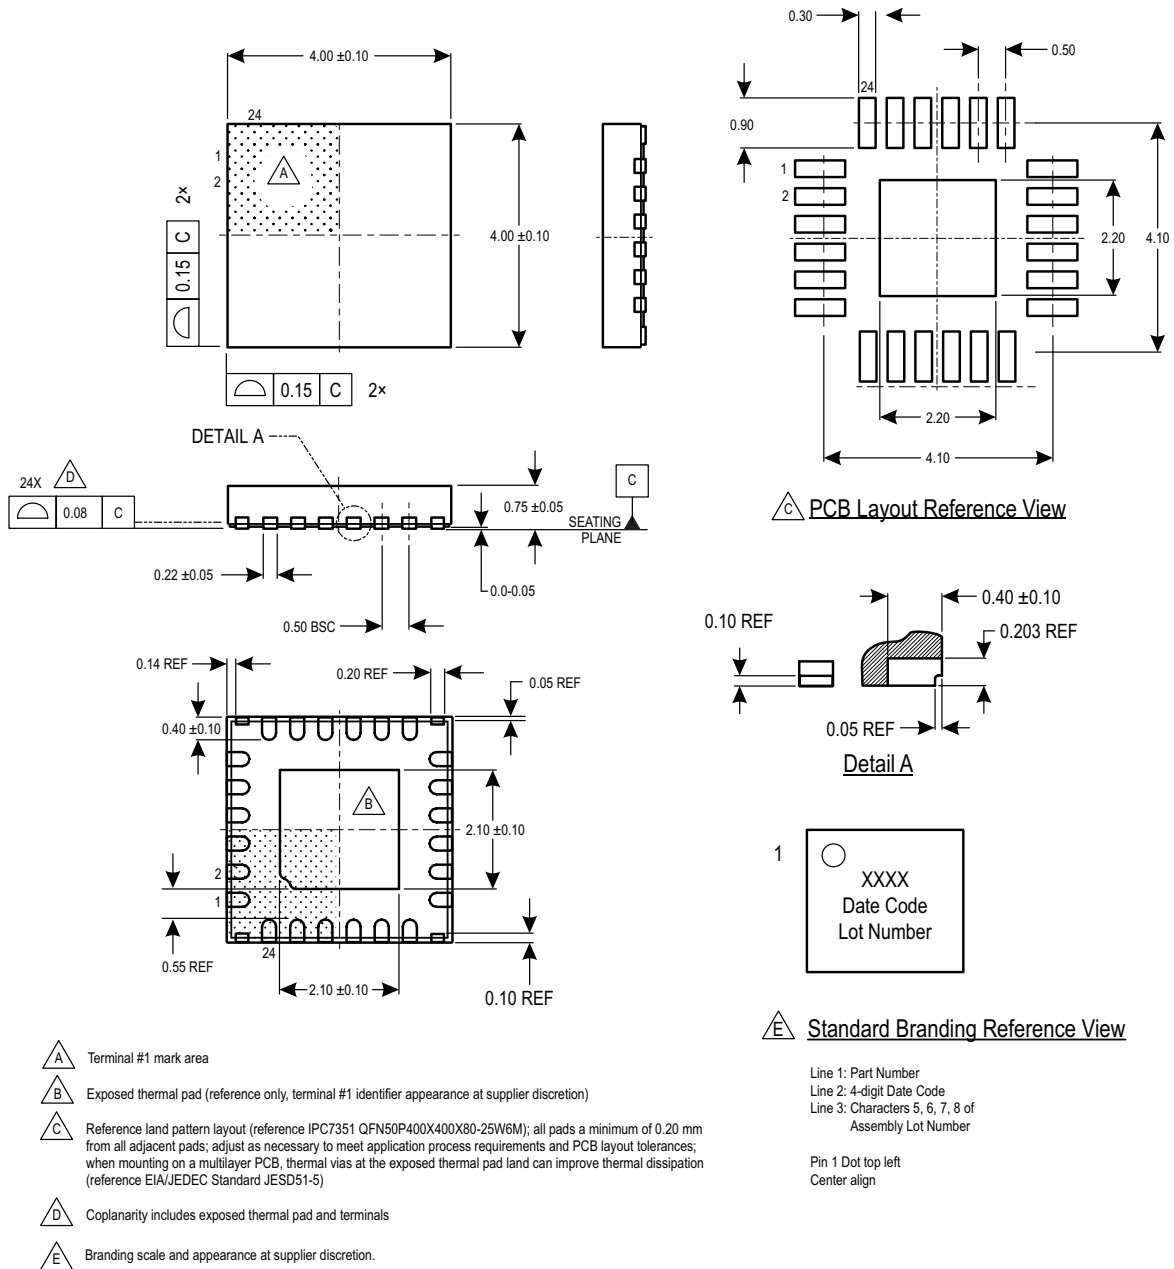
Package ES, 24-pin wettable flank QFN with exposed thermal pad
